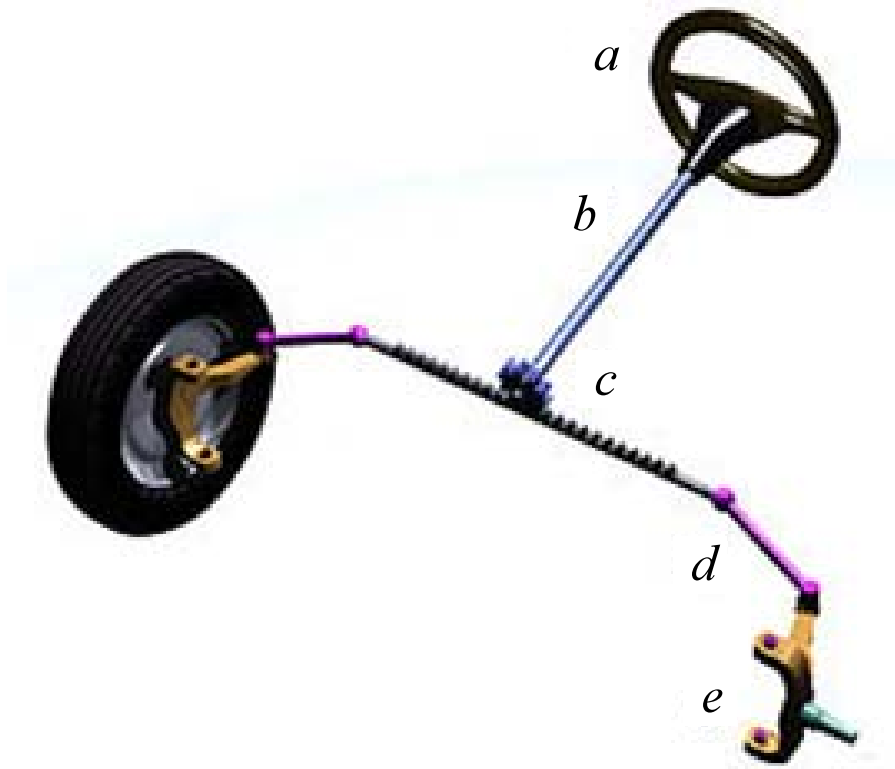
Structure of a conventional mechanical steering system. a. Steering wheel. b. Steering column. c. Rack-and-pinion d. Tie rod. e. Kingpin.
